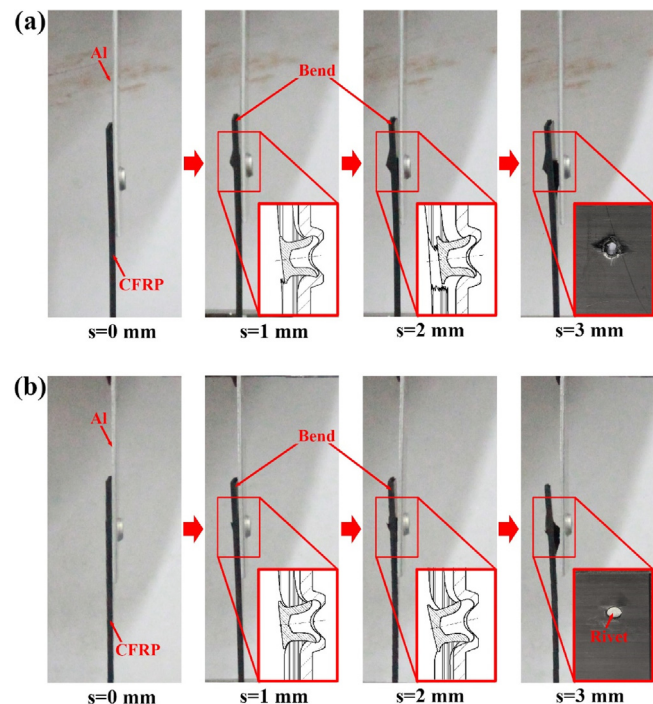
Shear failure processes: (a) the E-SPR joint and (b) the P-SPR joint.
